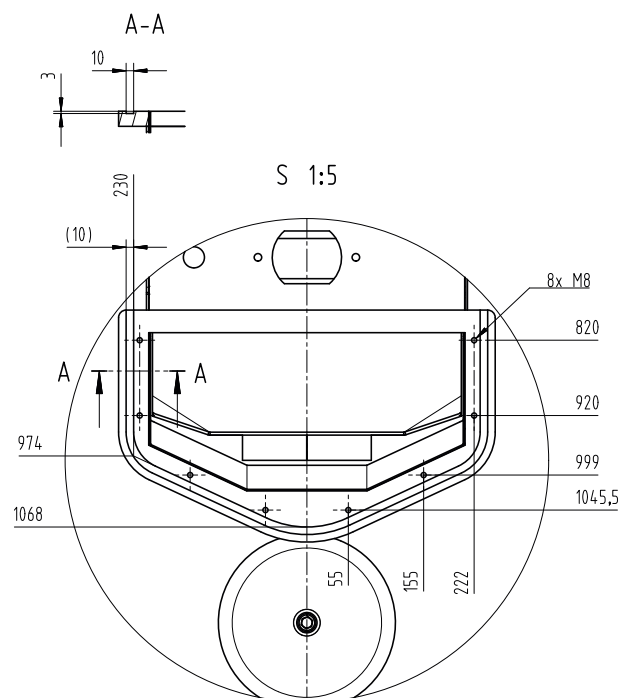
Example: at this face, the chip conveyor is fastened to a MS40-6 machine
